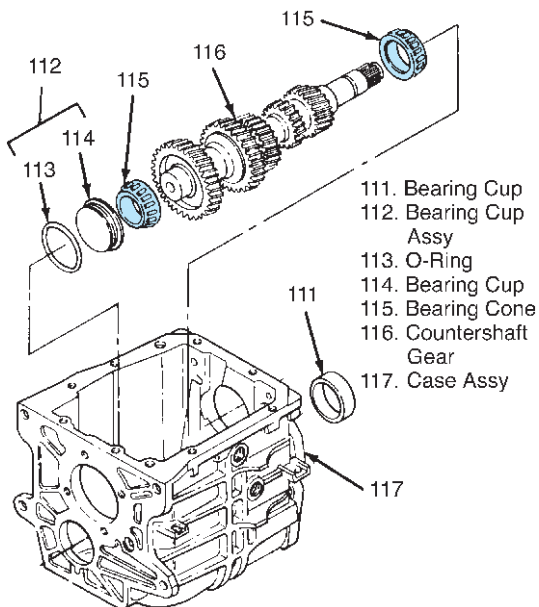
This countershaft gear is mounted on a pair of tapered roller bearings (115), which locate it in the case and allow it to rotate. (Courtesy of BWD Automotive Corporation)
